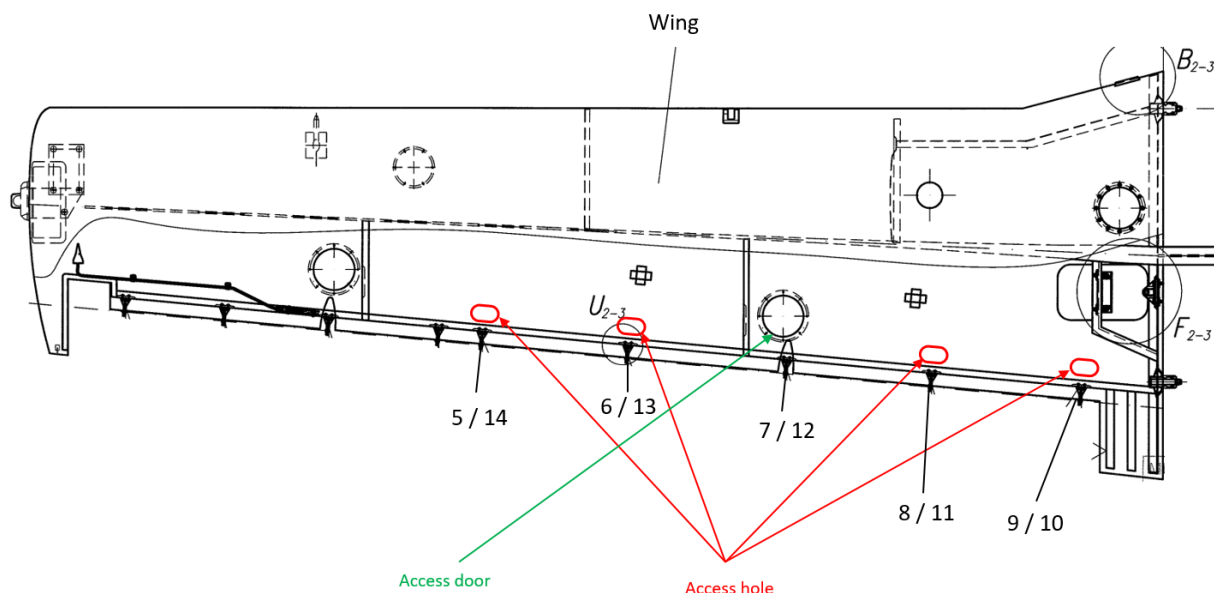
Wing Access Holes and Hinge Bracket Locations (LH shown, RH mirrored)
